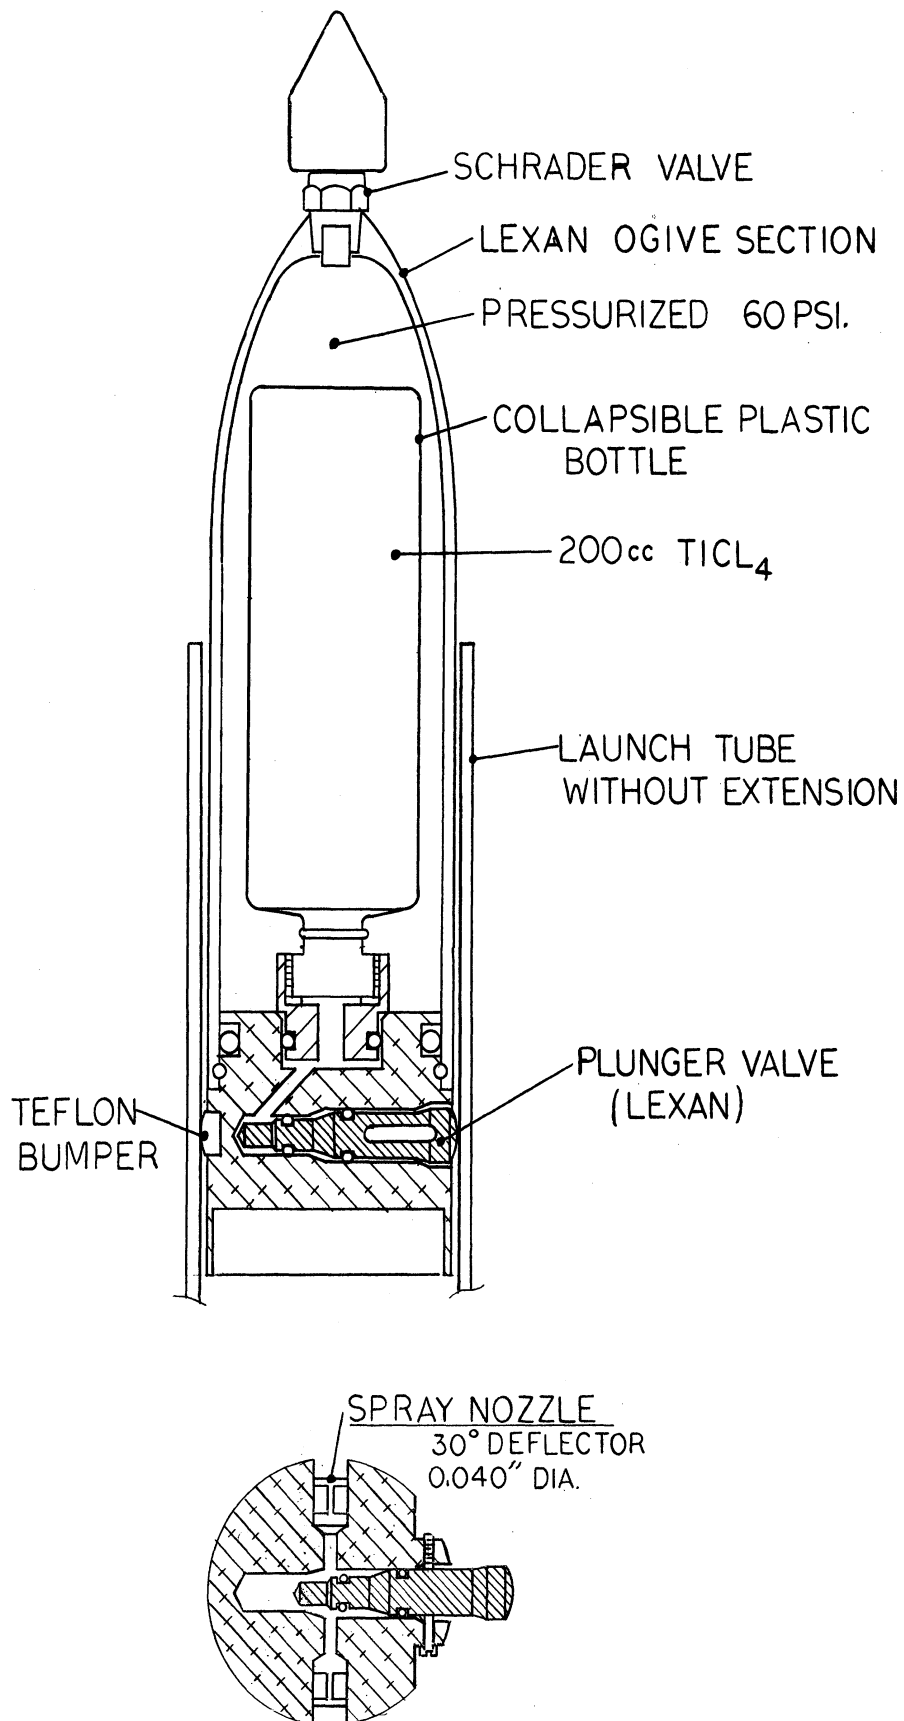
Schematic drawing of "smoke" rocket canister fitted with the "plunger valve" liquid release mechanism. In the upper drawing the "smoke" canister is shown in the rocket launcher being prepared for launch. The plunger valve is held in the closed position until the canister leaves the end of the launch tube extension. In the lower drawing, the plunger valve is shown in the open, or operated, position.
